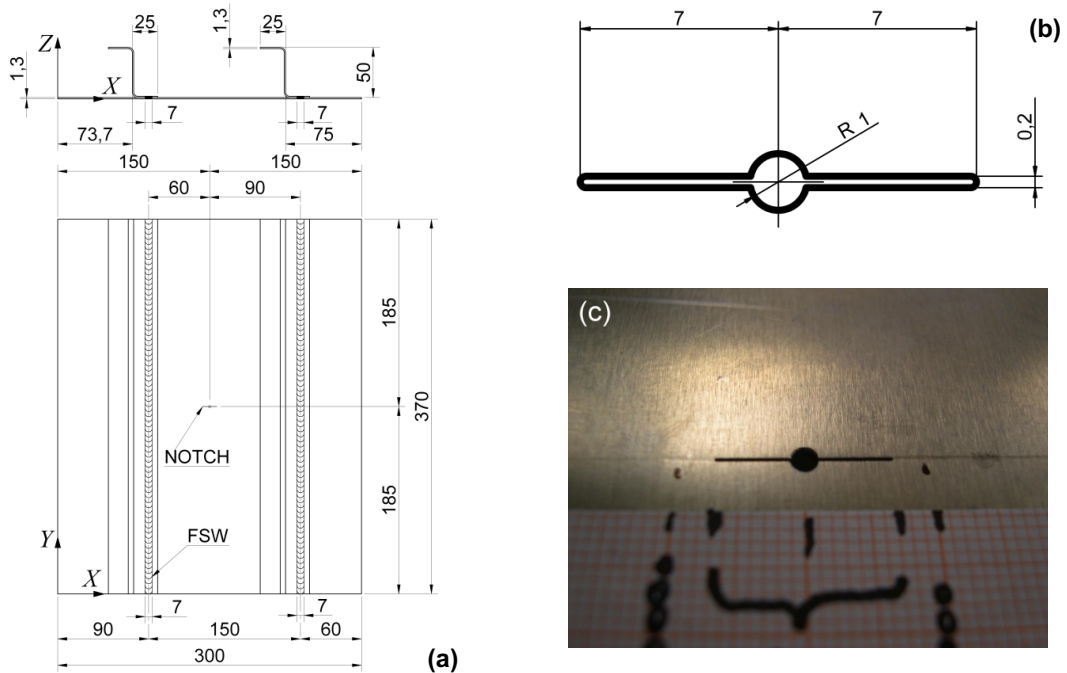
(a) Specimen geometry; (b) notch sizes; (c) detail of the notch made by EDM (the crack is also visible).
